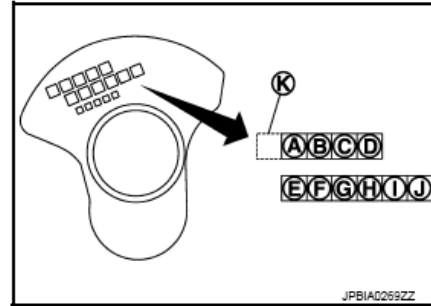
Identifying Crankshaft Pin Journal Diameter Grade Stamped On Crankshaft Front Side
